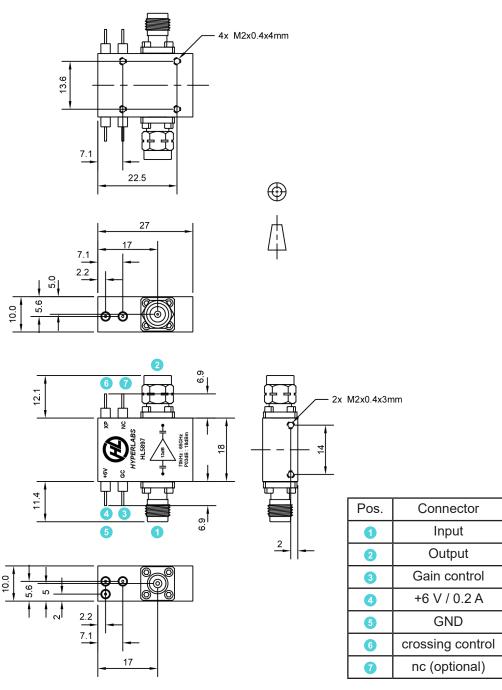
HL5897 mechnical drawing (opt. -18-JP), mm
